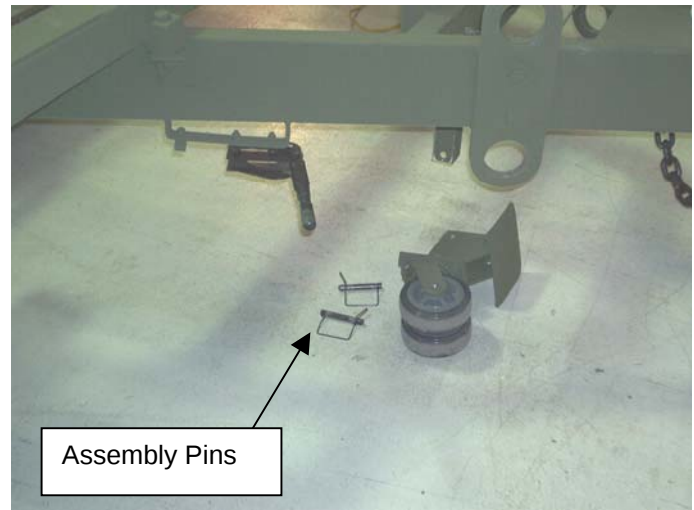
Dolly Wheel/skid Plate Assembly Removed
